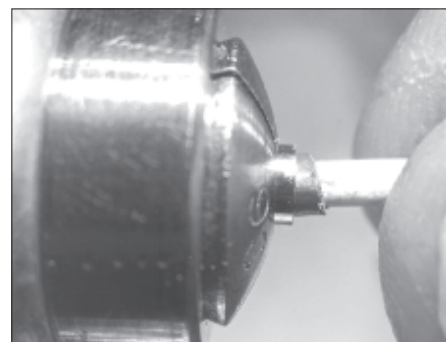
The emery paper was coiled around the toothpick and inserted inside the sleeve as it spun in the lathe.
